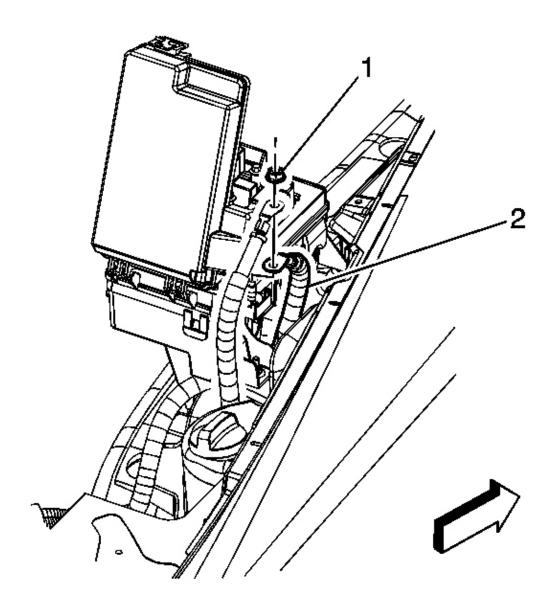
View Of Positive Battery Cable Lead & Nut Courtesy of GENERAL MOTORS CORP.
